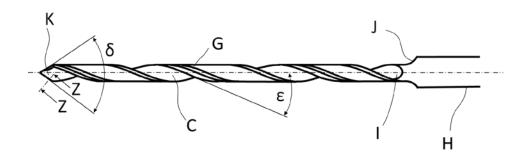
new drill bit design comprising one single cutting edge and one spiral flute with specific rake and helix angles
